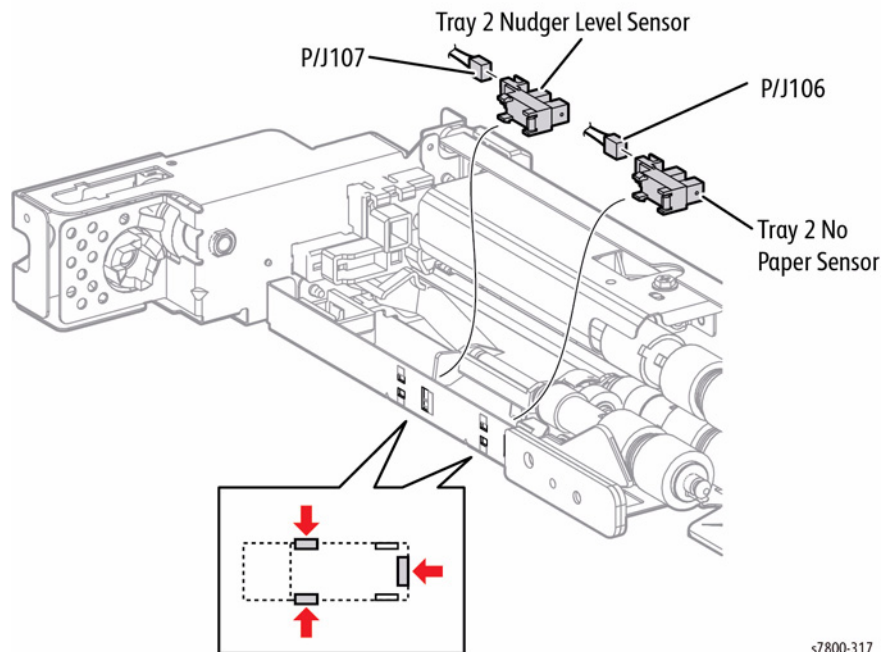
Removing the Nudger Level Sensor/ No Paper Sensor
